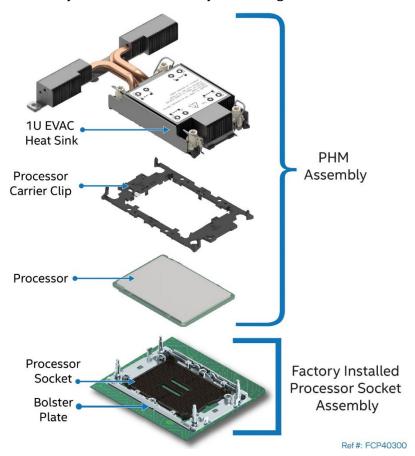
Processor Heat Sink Module (PHM) Reference Diagram
